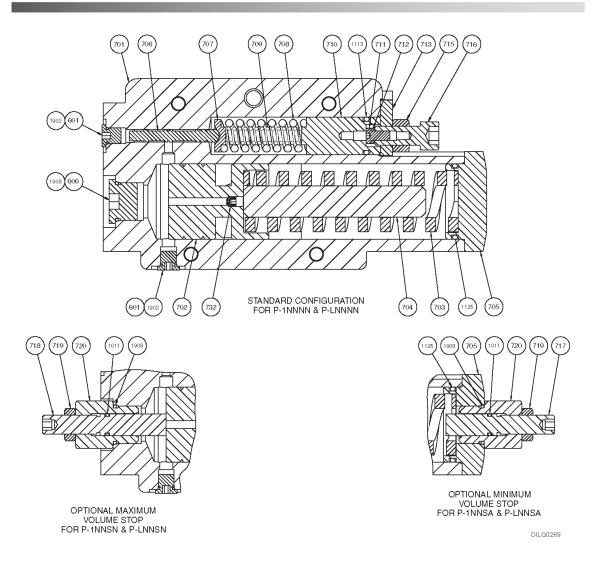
Parts Drawing for "P-1NN" and "P-LNN" Control (519975-201 sheet 1)
